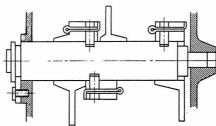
When installing the shift drum and forks, install cotter pins through guide pins in direction shown. Be sure that forks do not touch cotter pins.
